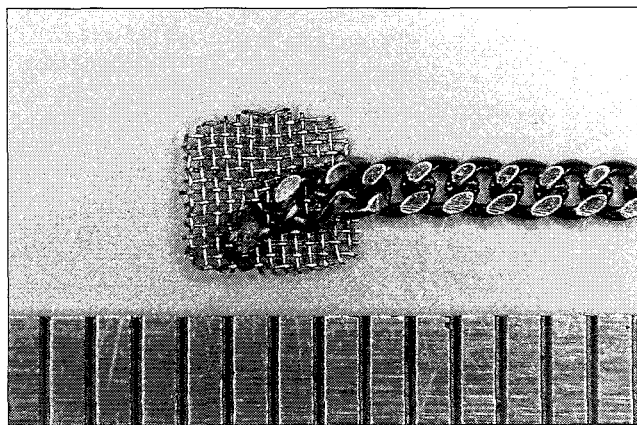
Tag of ligature welded to a corner of the mesh pad.
